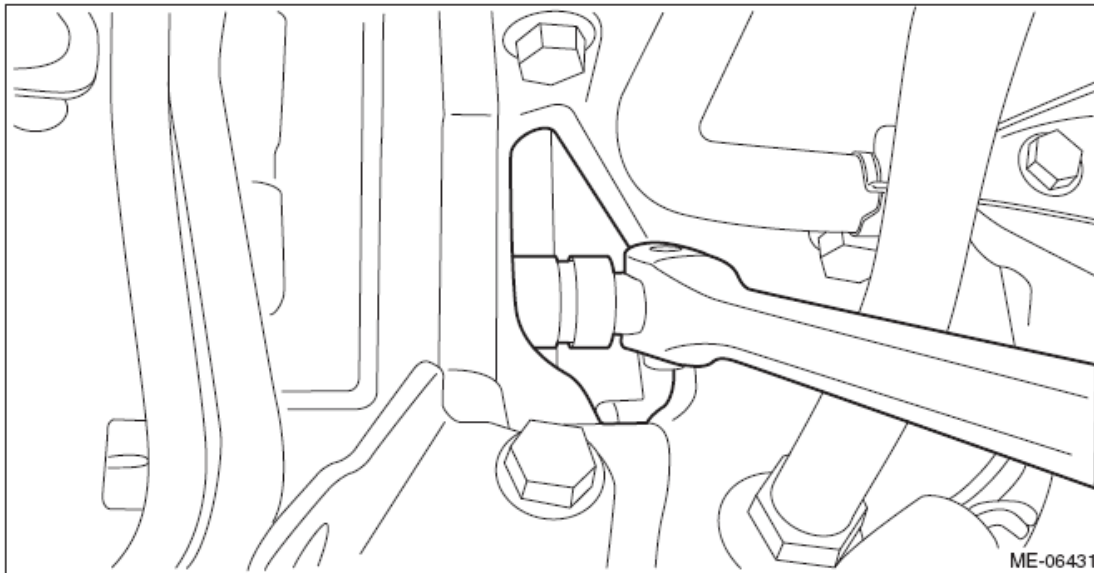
Inserting Wrench Into Crank Pulley Bolt
